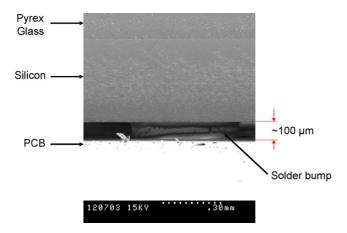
SEM image of a solder bump of a flip-chip packaged pressure sensor.
